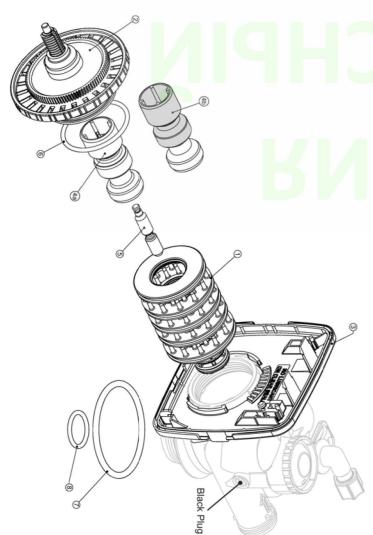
Drawing number parts 2 through 6 may be purchased as a complete assembly, part V3002C
